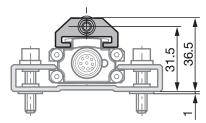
Dimensions and distances with BTL5-T-2814-1S magnet
